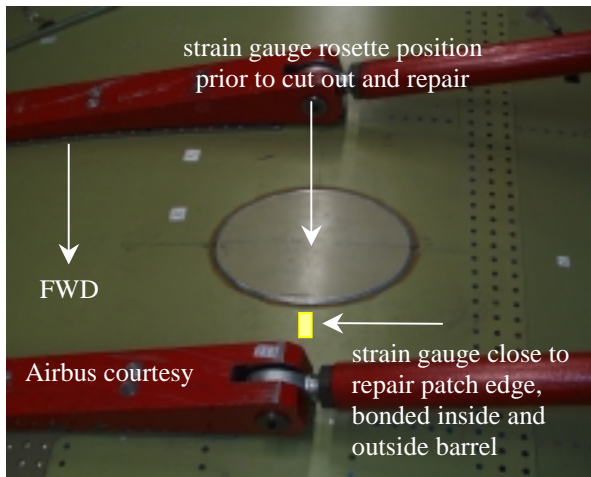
Bonded repair patch on Megaliner Barrel, view from outside, between frames 73 & 74
